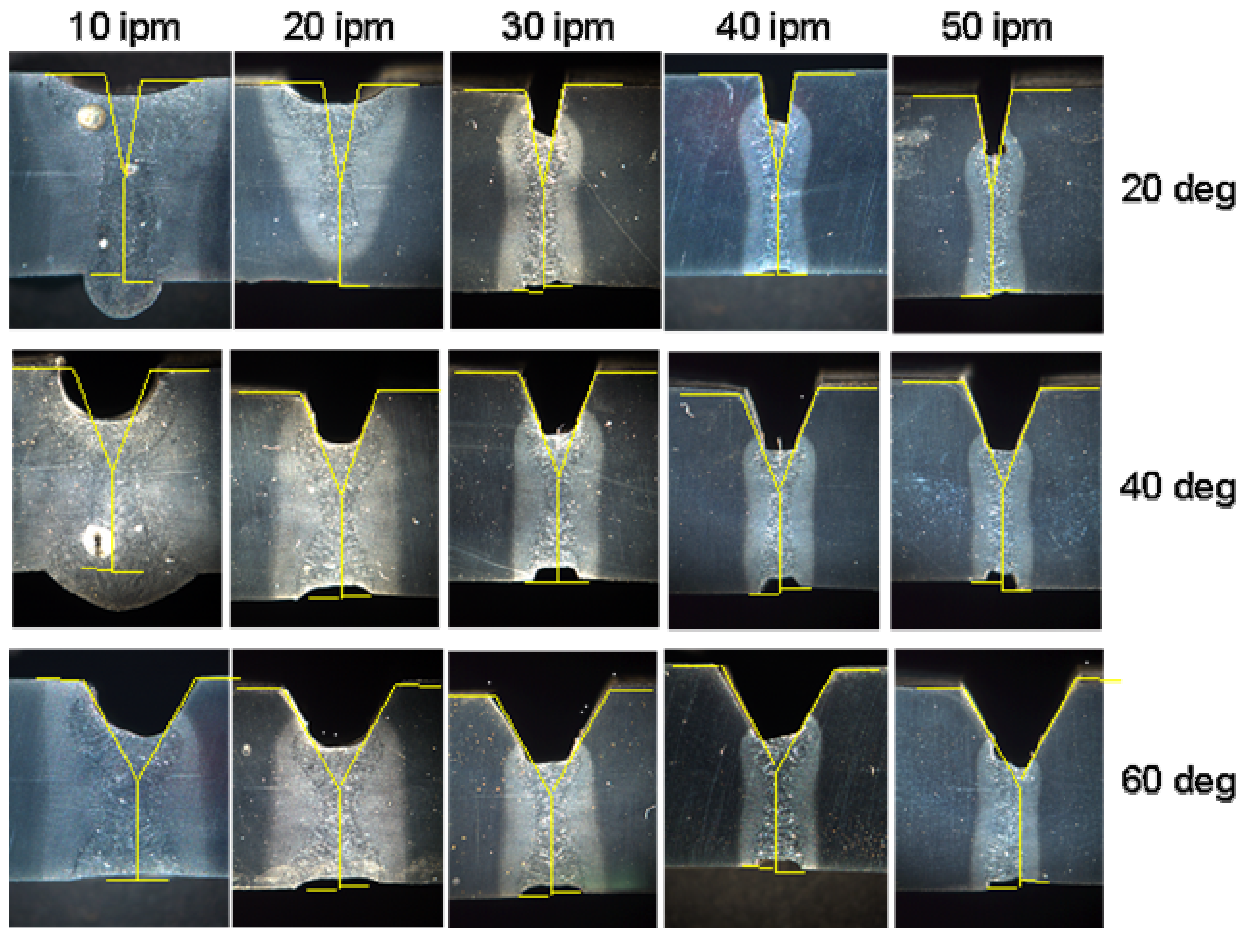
Autogenous laser welds in different joint configurations (10 mm thick mild steel, 5 mm land).
